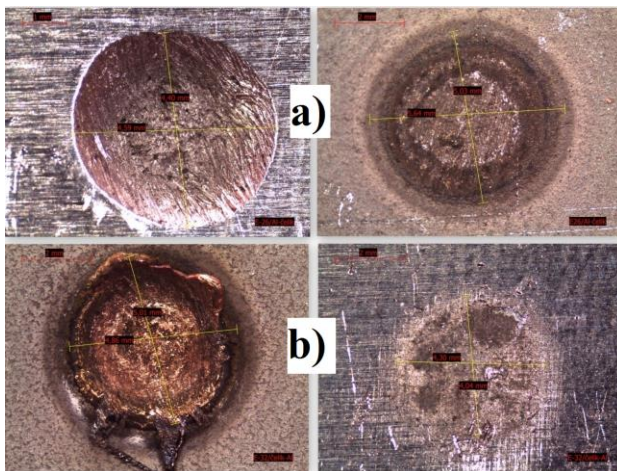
a) Spot weld when aluminum is in a contact with upper electrode; b) Spot weld when steel is in a contact with upper electrode
